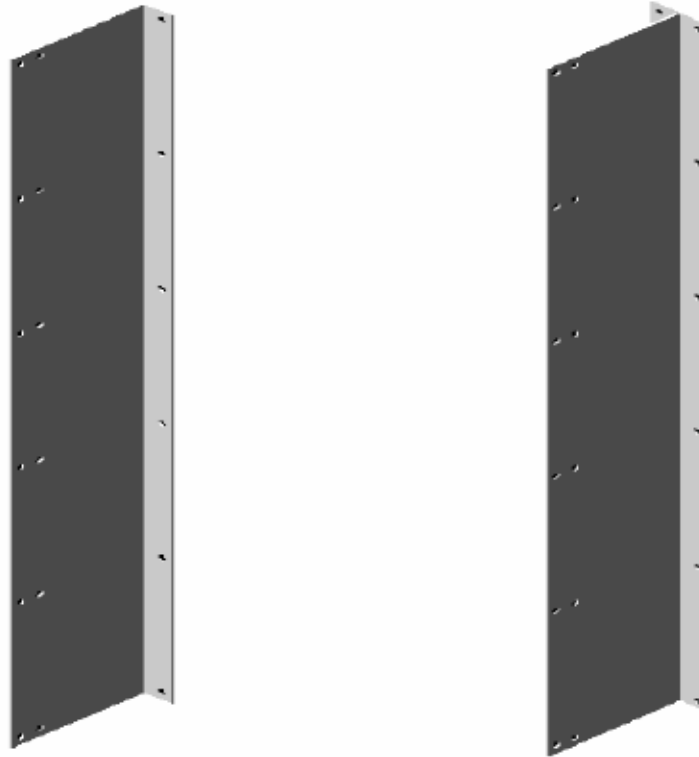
Split vertical connector (left) used for corners and vertical connector (right) used for joining adjacent bins
